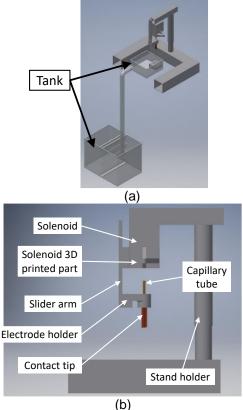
a) Complete proposed EDM design, and b) Electrode holder component (Side view)
